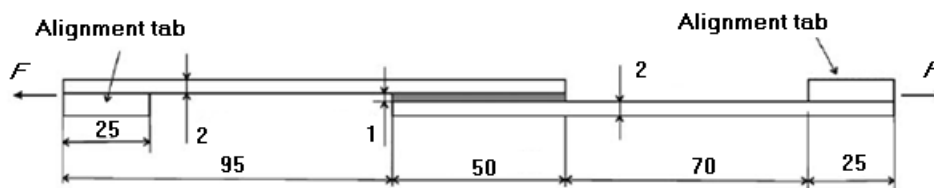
Geometry of the SLJ test specimens (dimensions in mm).
